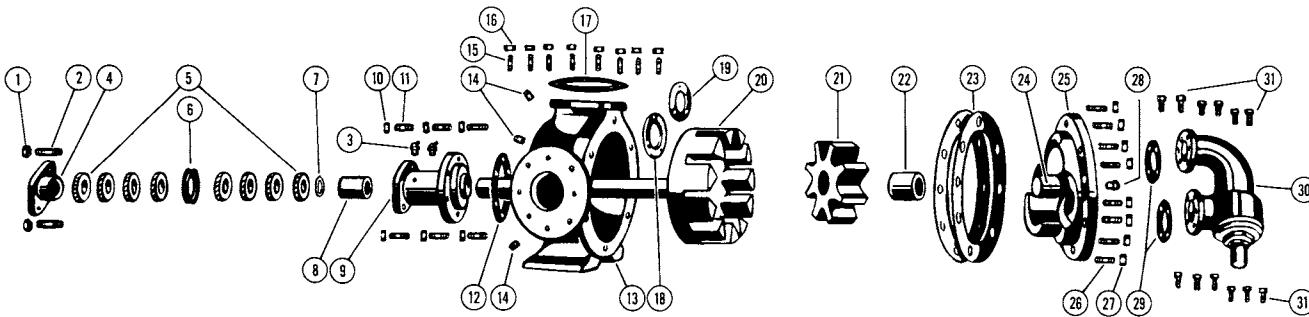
EXPLODED VIEW MODEL LQ32 PUMP
